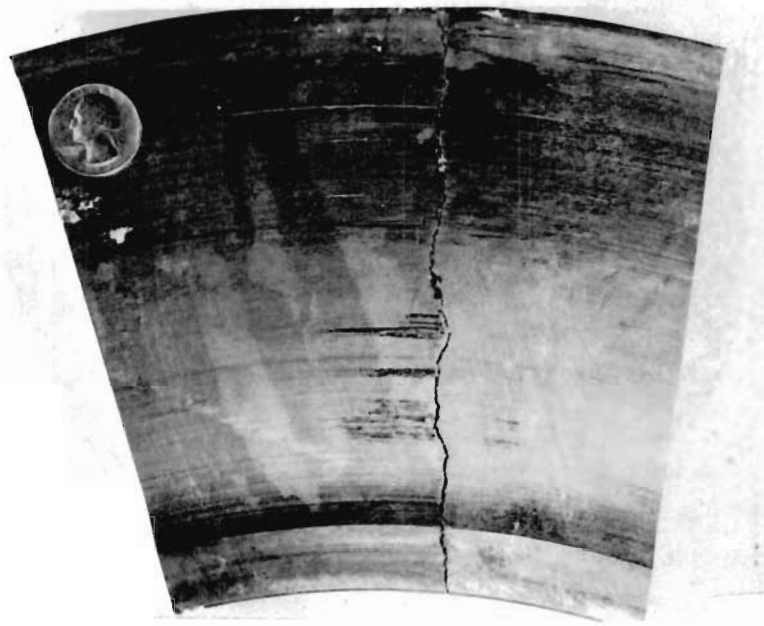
KNORR DISC BRAKE WITH HEAT CHECKS (minor cracks) AND MAJOR CRACKS. THE CRACK RUNS FROM THE INNER RADIAL EDGE (lower part of photograph) TO THE OUTER RADIAL EDGE (upper part of photograph).
